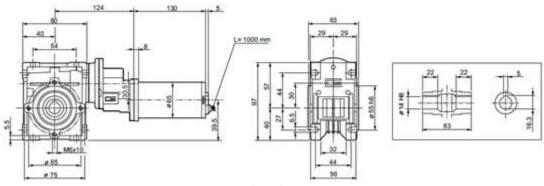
TRANSTECNO ECMP070/056/030 U Electric Motor Scheme [123]
